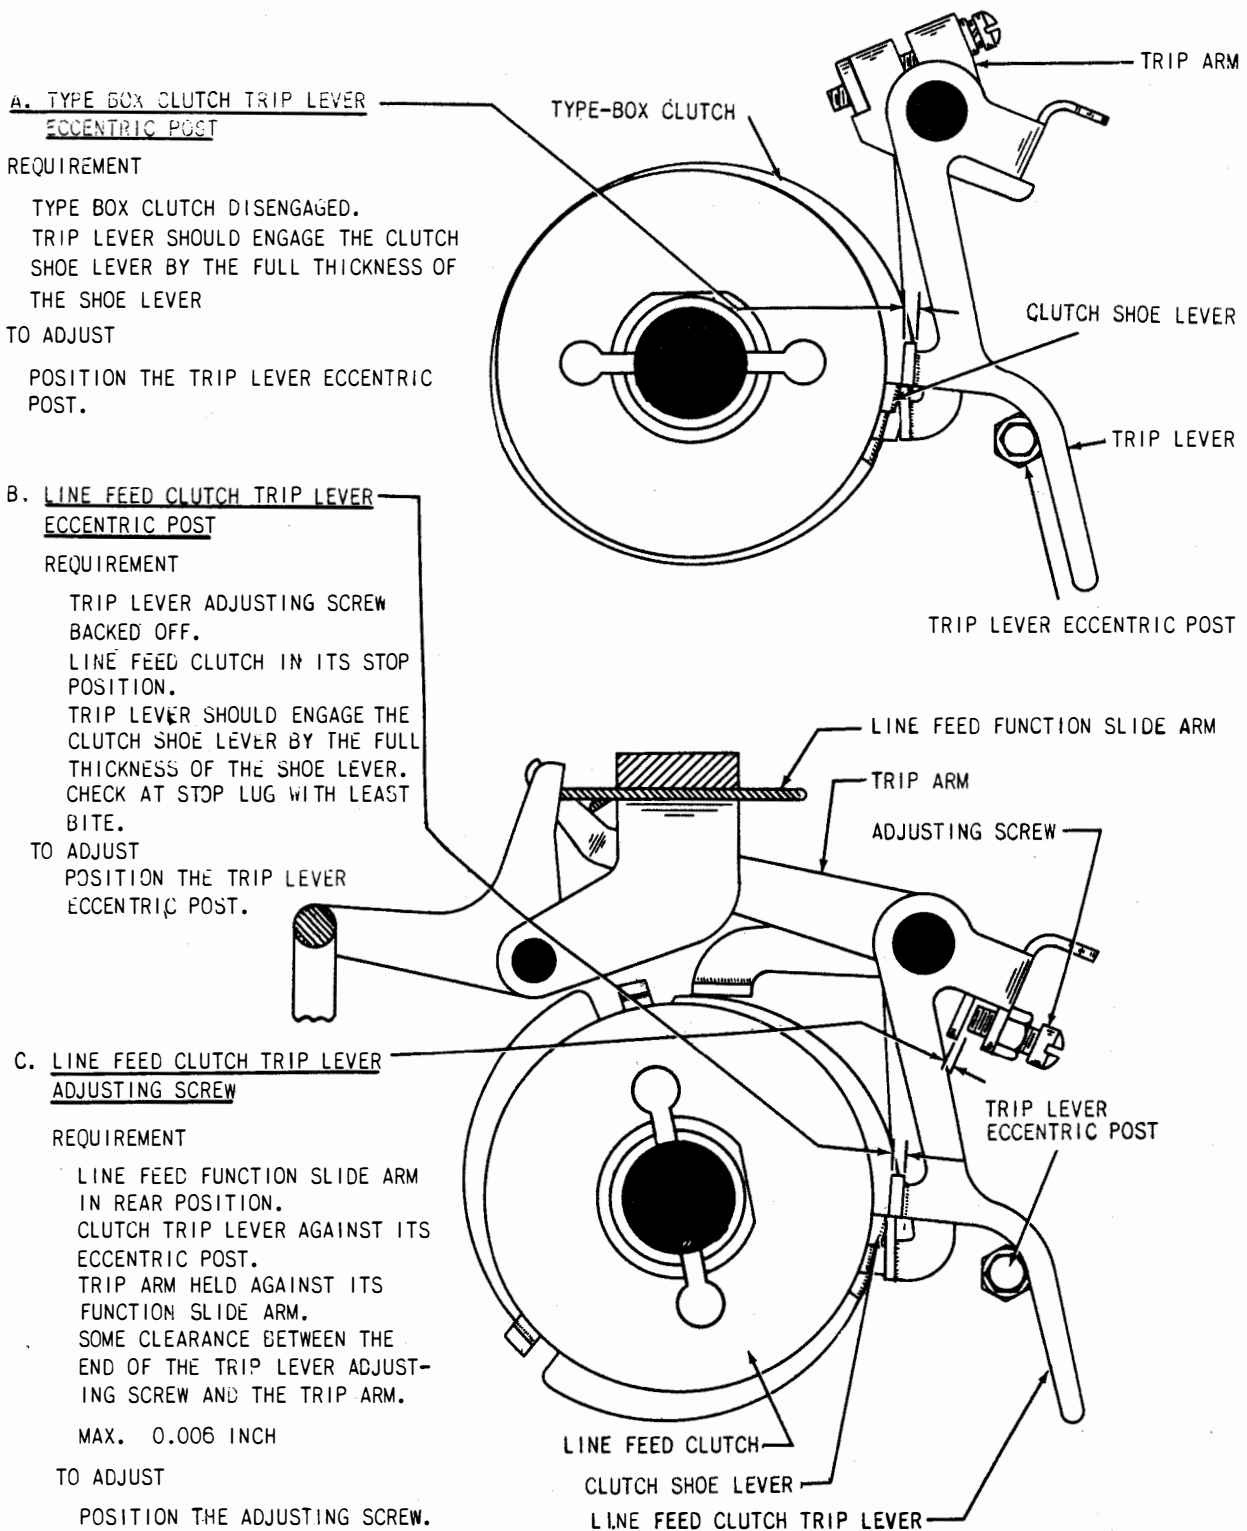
Automatic Typewriter, Type Box Clutch and Line Feed Clutch Mechanism
